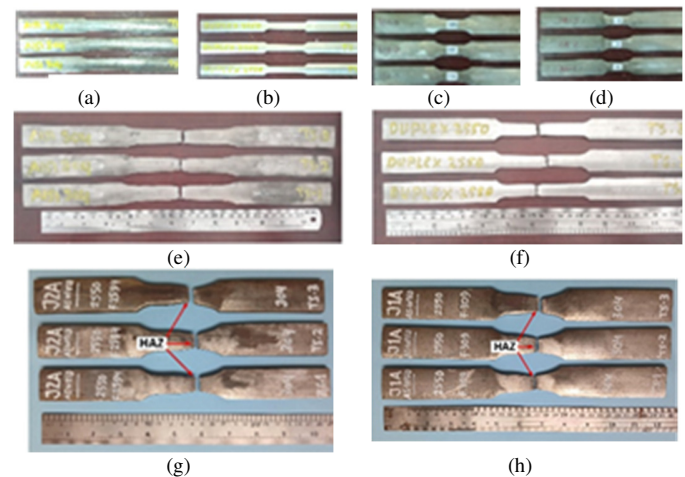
Base metal and weld joint of duplex S32550 and TP304 tensile test samples: (a) base metal TP304, (b) base duplex 2550, (c) weld joint with filler 2594, (d) weld joint with filler 309, (e) base TP304 after tensile test, (f) base duplex S32550 after tensile test, (g) weld joint with filler 2594 after tensile test, (h) weld joint with filler 309 after tensile test.
